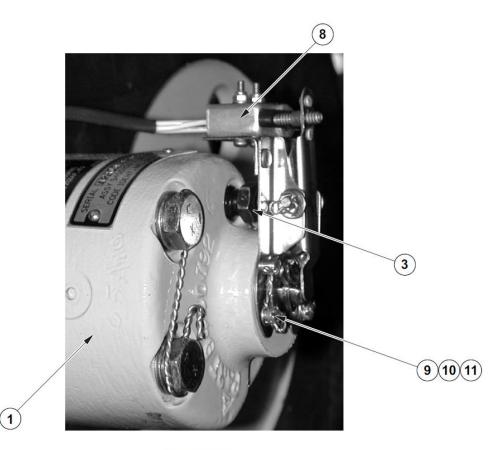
Rotor Brake Assembly (Sheet 1 of 2)
